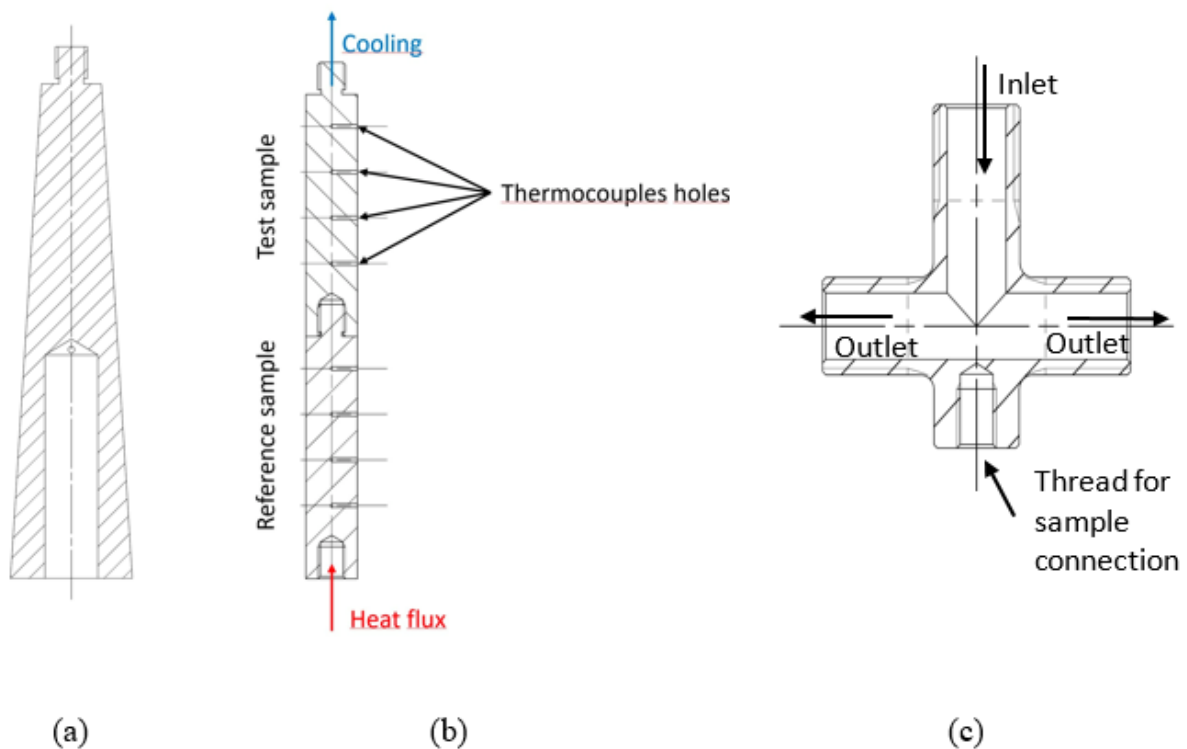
Experimental setup components: (a) pure copper heater cone made, (b) test sample and reference samples, (c) water cooler made by 3D printed pure copper.
